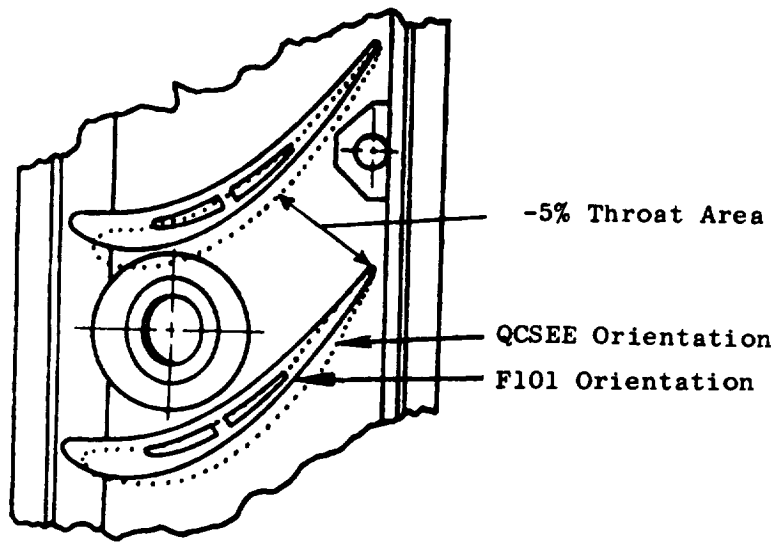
Low Pressure Turbine Stage 1 Stator Assembly.
